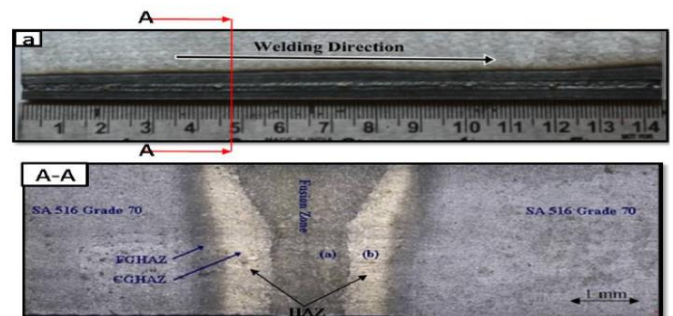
(a) Laser weldment (A-A) Macrograph of laser weldment [10]
